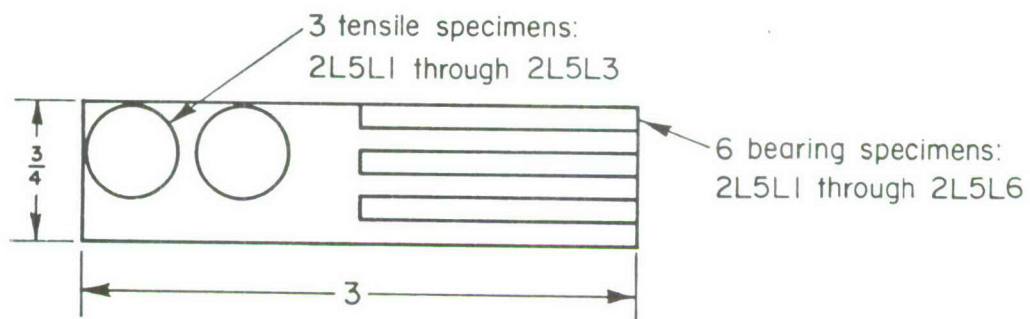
LOCATION OF TEST SPECIMENS FOR
